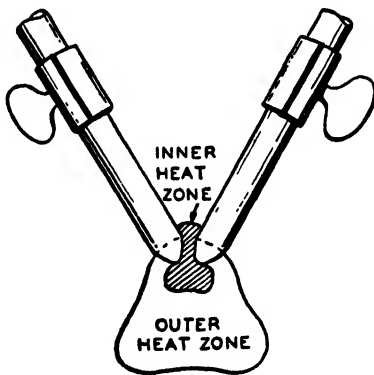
Set the carbons of the arc torch to project 2 to 3 in. from the holders, and turn them or trim them so that they have even surfaces opposite each other. (James F. Lincoln Arc Welding Foundation)
